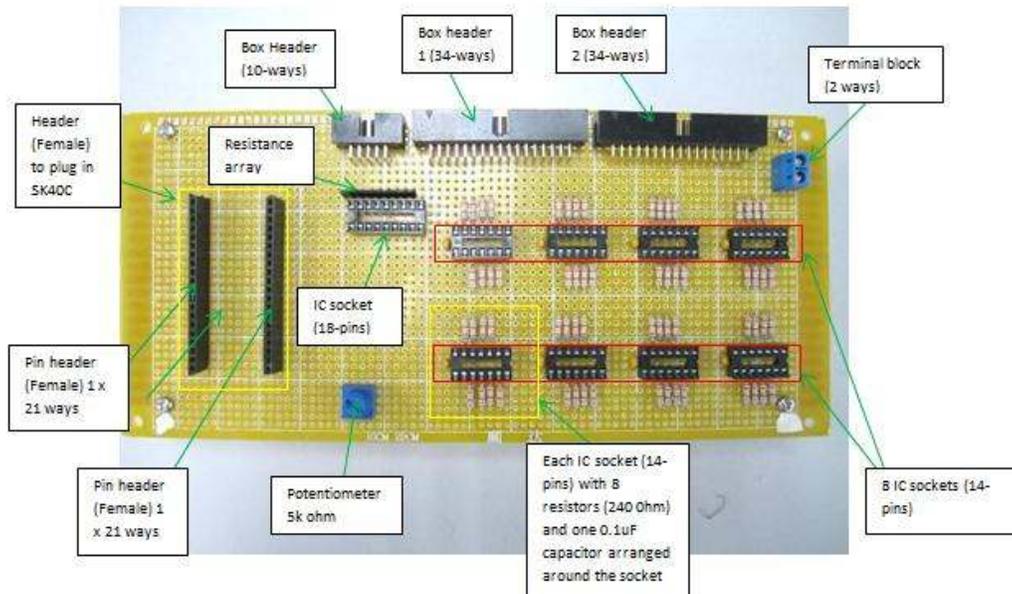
Overall arrangement of electronic components, socket and connectors on donut board
